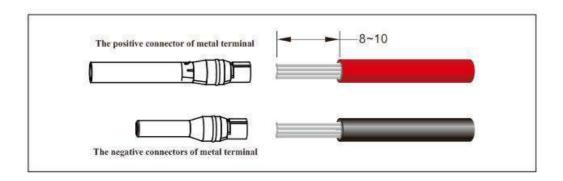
Stripping the insulation layer from DC power cables (unit: mm)
